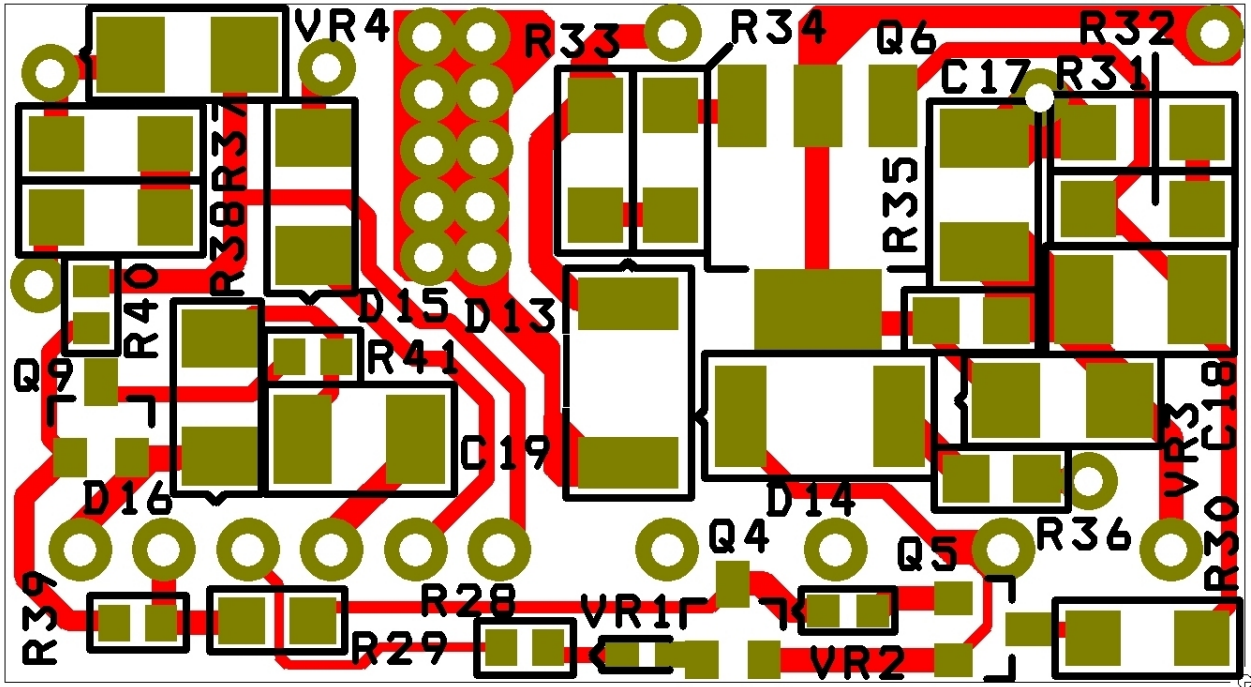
Printed Circuit Layout, Bottom Side (Daughterboard).
